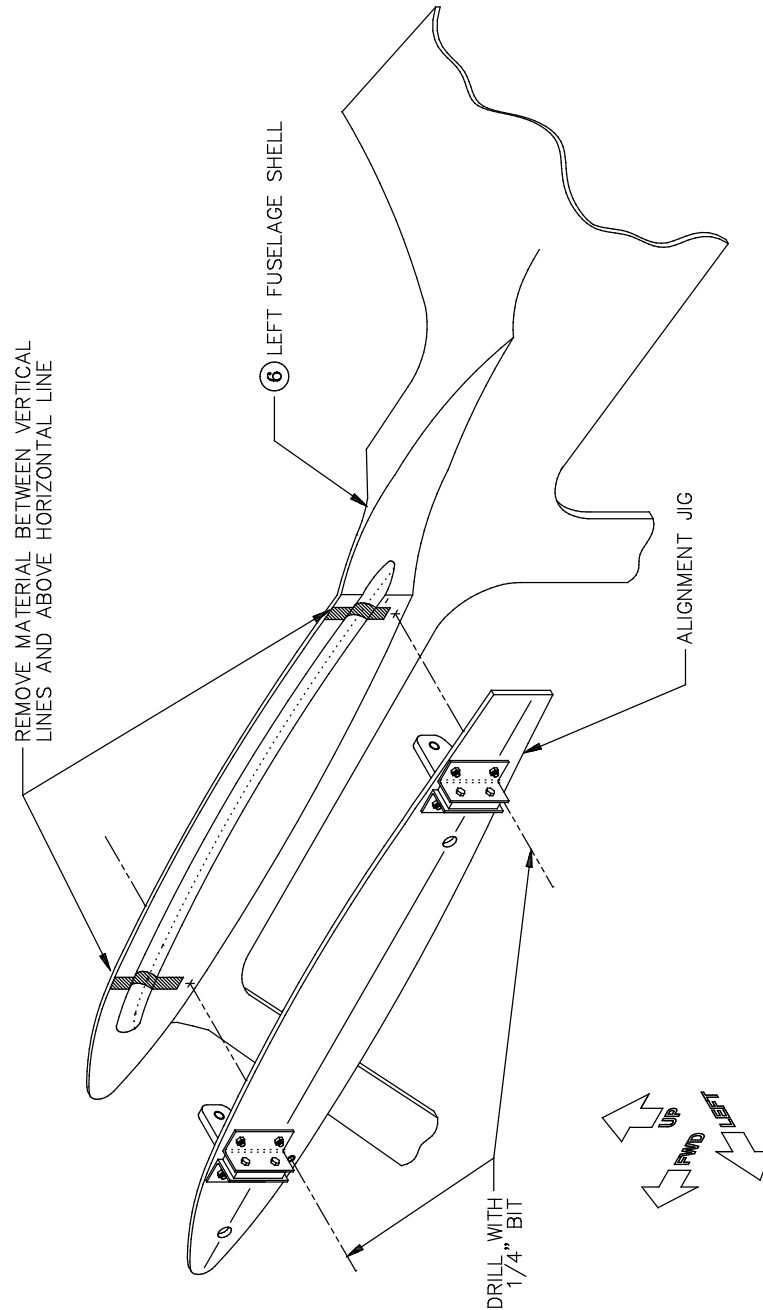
Mounting the Fuselage Shell Alignment Jig on the Shell
